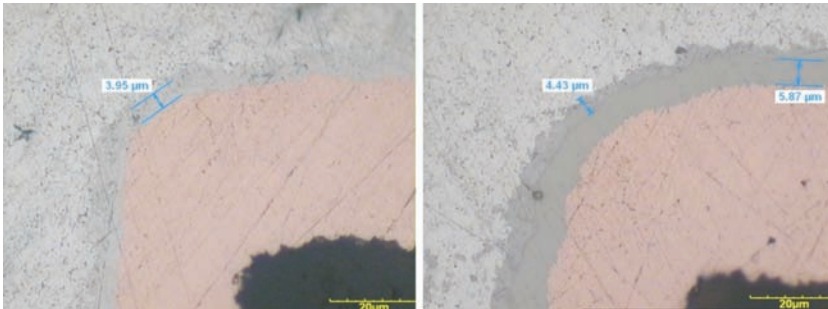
Microsection on connector pins after intrusive reflow with tin/copper/nickel paste. OSP board (left). Gold over nickel finish (right). The microsections were taken so the copper plating thickness could be measured after soldering to examine the difference in copper dissolution between SAC and tin/copper/nickel alloys. The solder joint strength and long-term reliability of PIHR are no different than with conventional wave or manual soldering operations. The joints also easily meet the visual requirements for national and international standards like IPC 610E.
